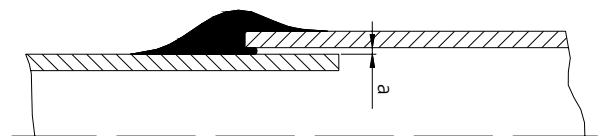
Lap joint with extrusion welding (for liners/sheets with a thickness of up to 3.5 mm)
